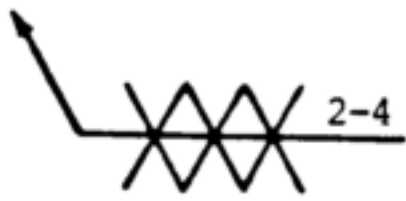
Dimensioning of intermittent resistance seam welds.
